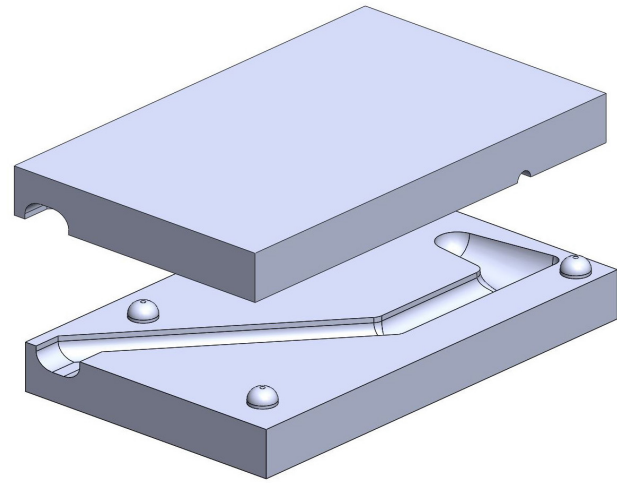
Hutchinson, (2021). Woodpecker beak CAD mould
